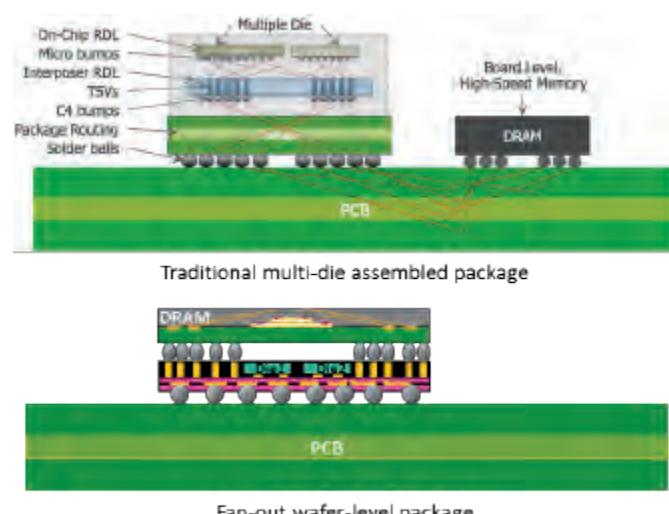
Fan-out wafer-level packaging can significantly reduce the package footprint.
